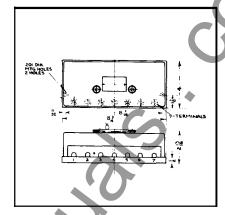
Outline Dimensions and Drilling Plan for Phase Shifting Transformer used with 3-phase, 3-wire Varmeter.
